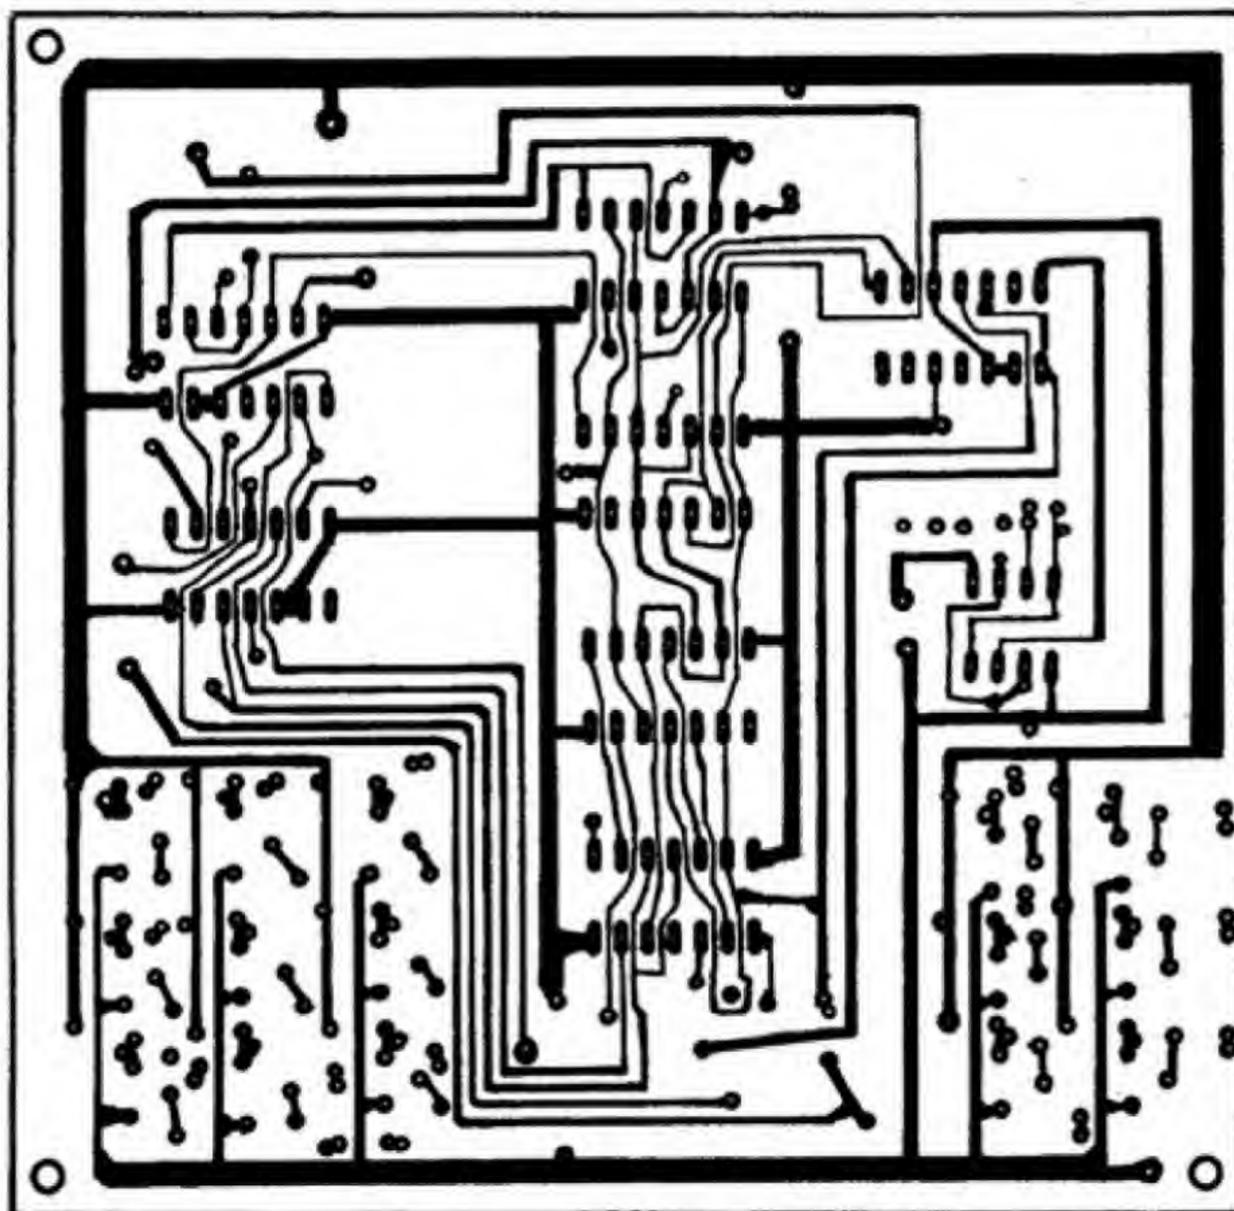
PCB layout for the circuit shown in Fig. 1.
